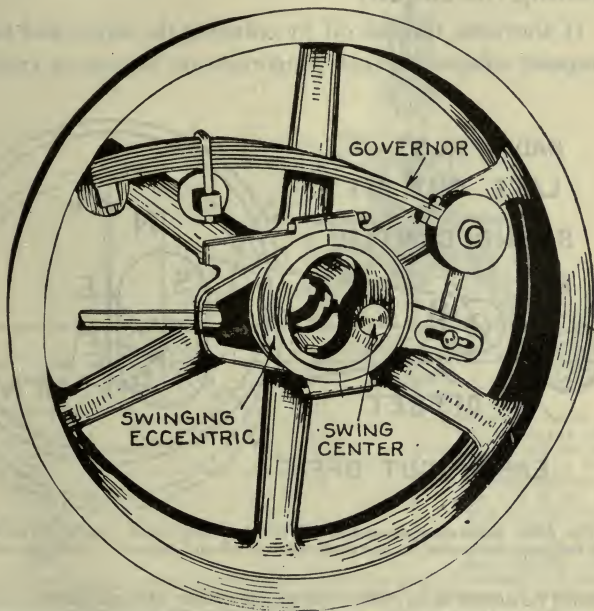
Fly wheel and governor of Buffalo engine illustrating the swinging eccentric. It should be noted that in the design here illustrated the swing center is near the radial slot instead of at the end of the arm as in fig. 438.
